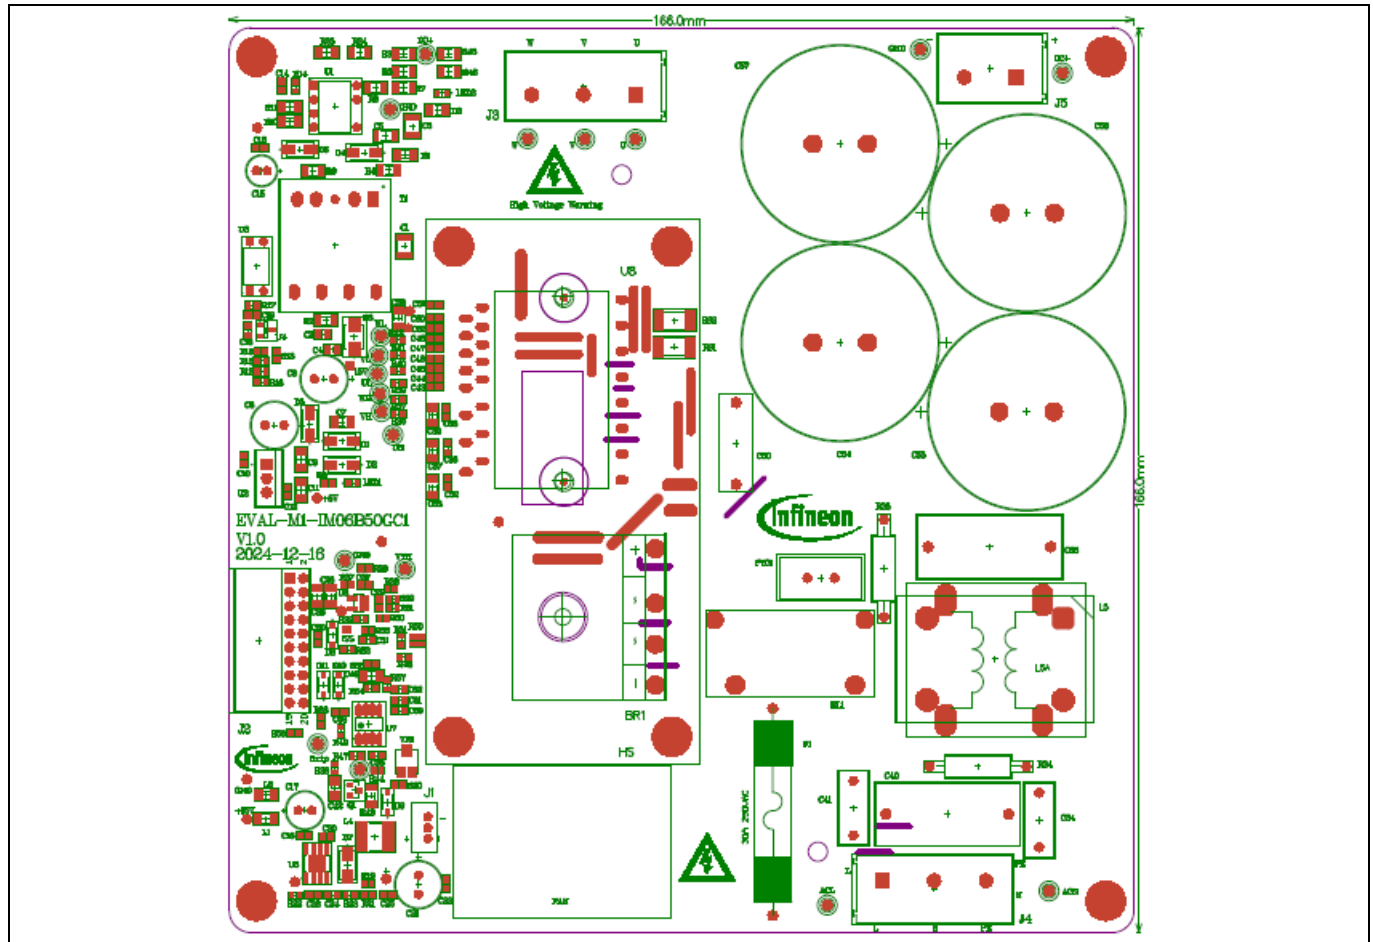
Top assembly print of the EVAL-M1-IM06B50 reference design
